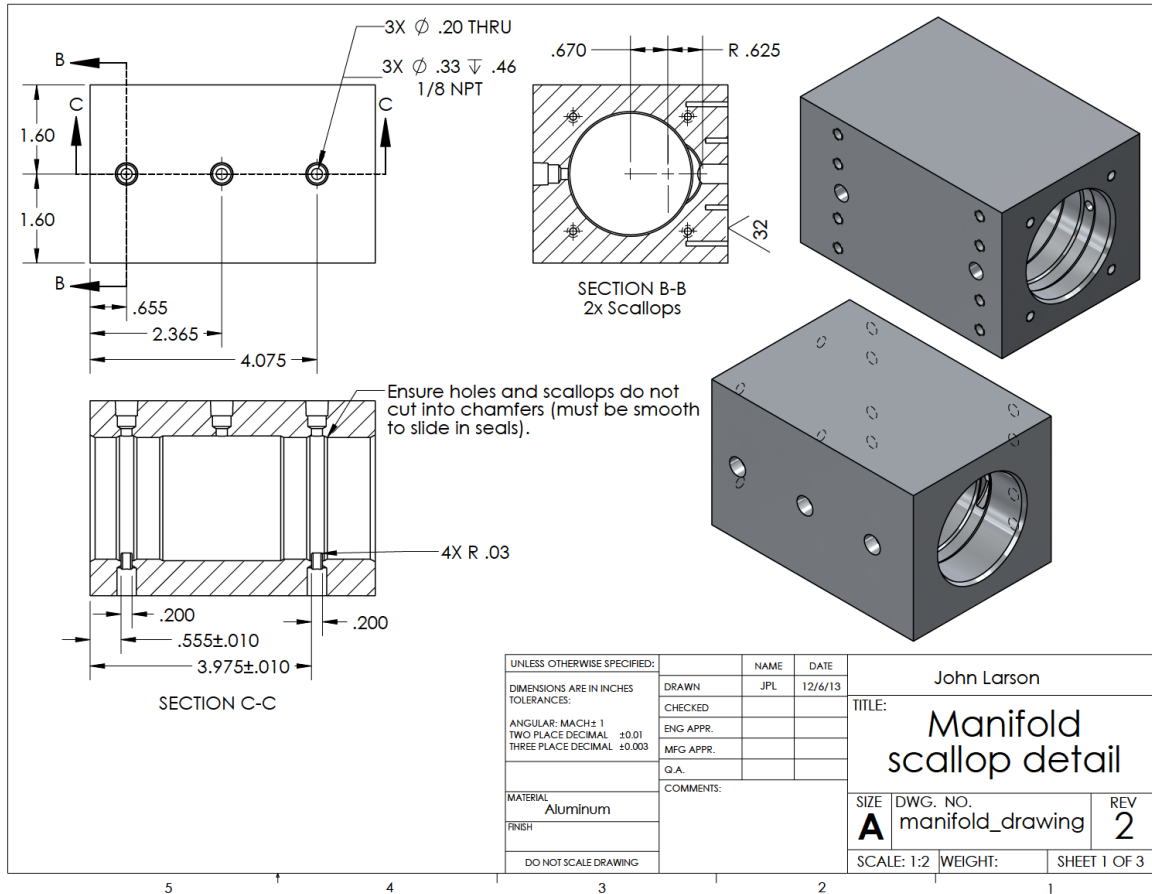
Detailed drawing of the manifold to interface with the hydraulic actuator centerline.
